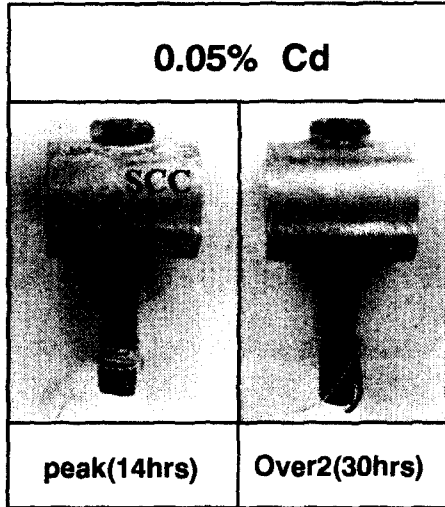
Macrographs of C-ring test specimen; peak aged 0.05% Cd containing Al-Cu-Mn alloy shows SCC cracking.
